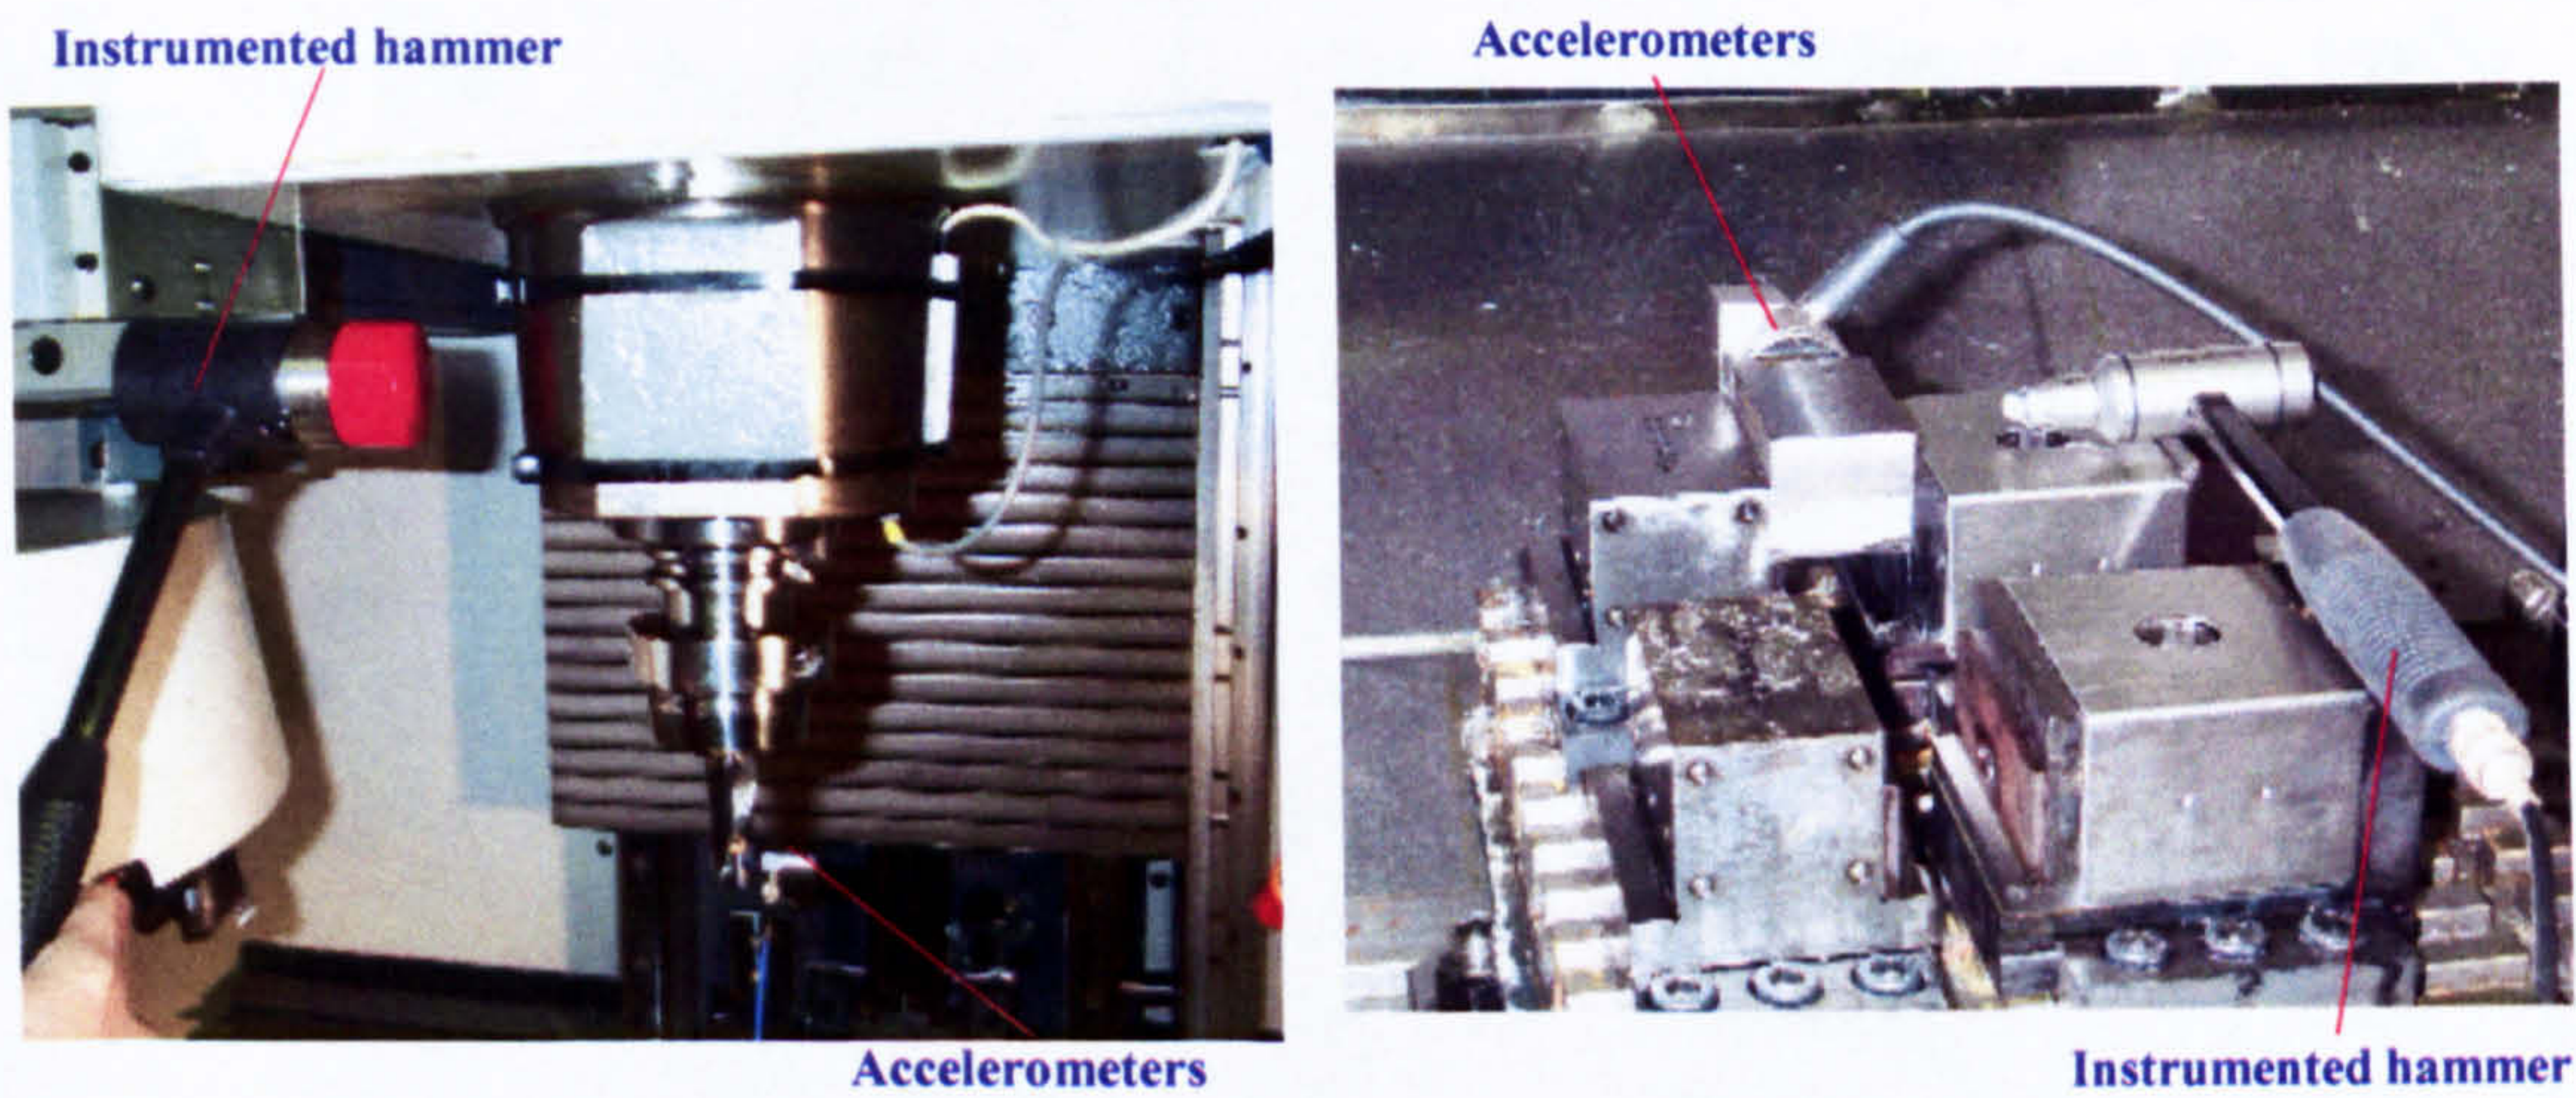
Experimental modal analysis configuration for the cutting tool and workpiece
